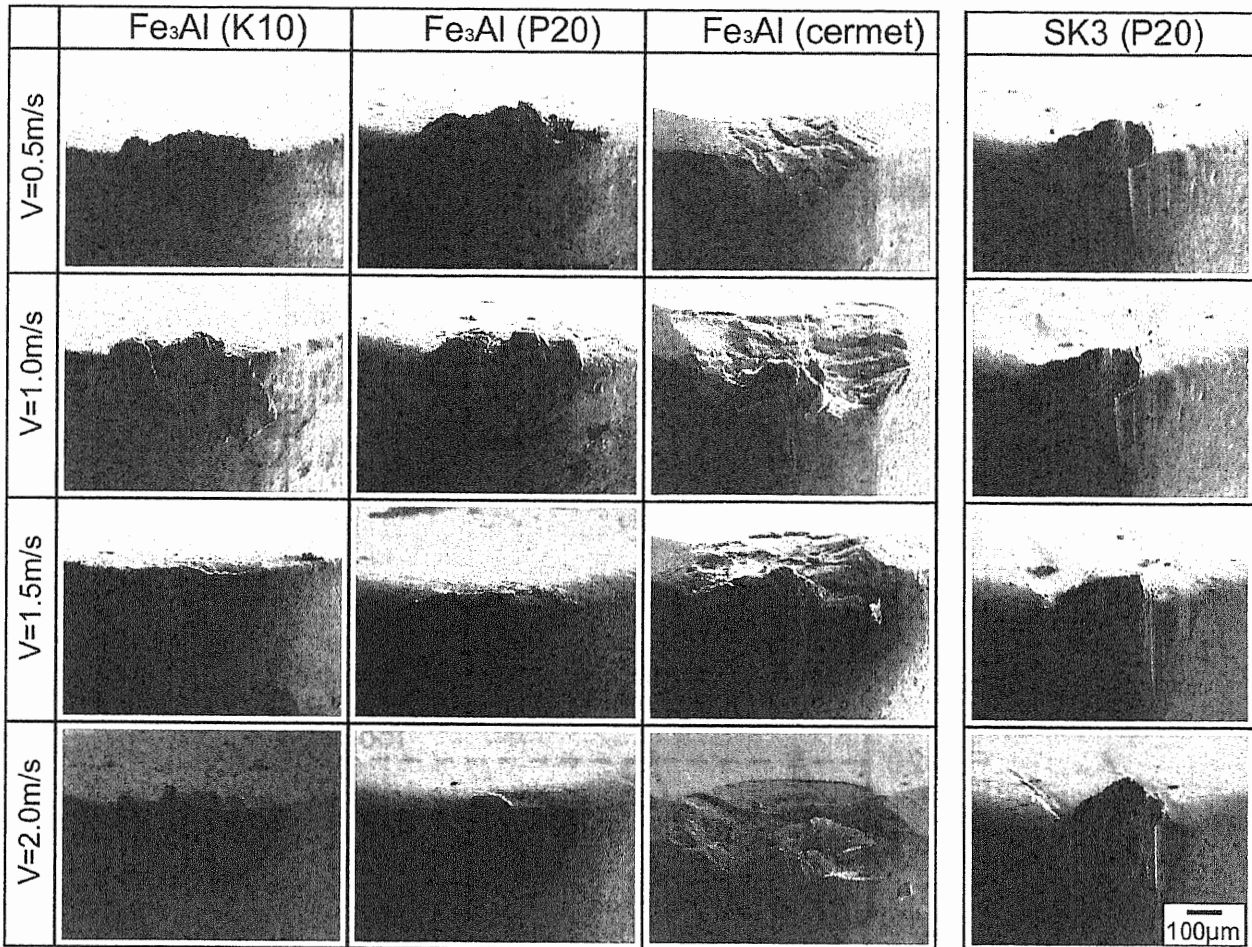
Micrographs of tool tips after the cutting tests. (Flank wear VB ≈ 0.2mm).
